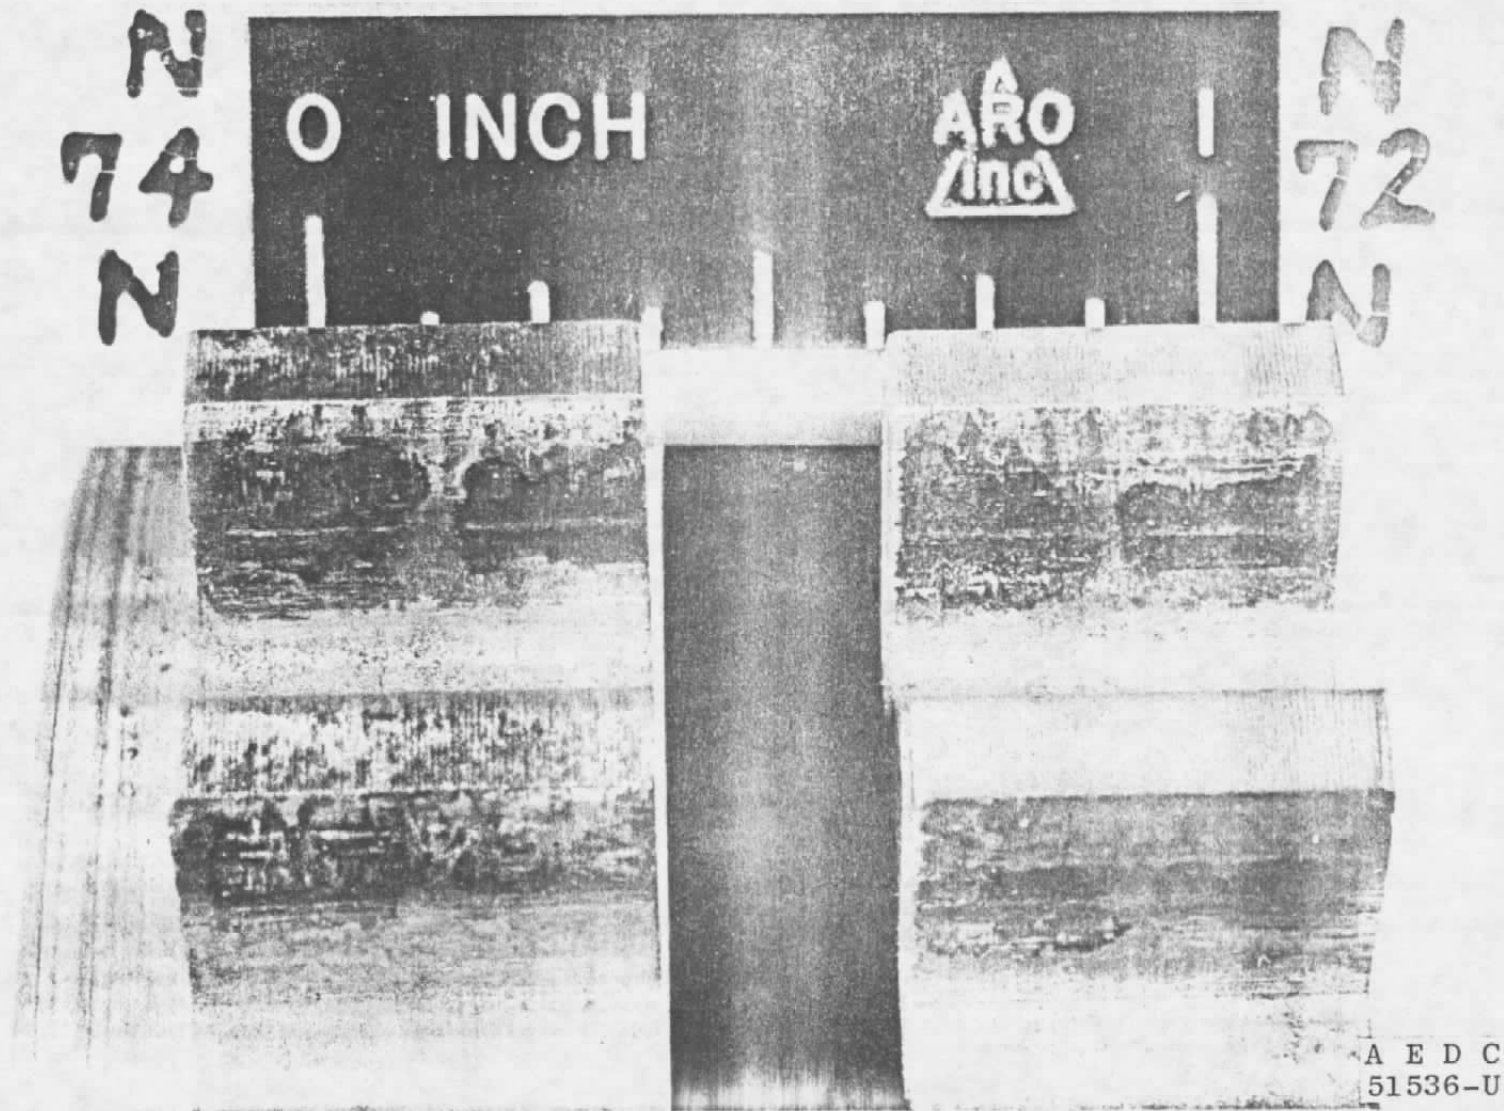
7-D.P. Steel Gears after 100 hr in Test 4
